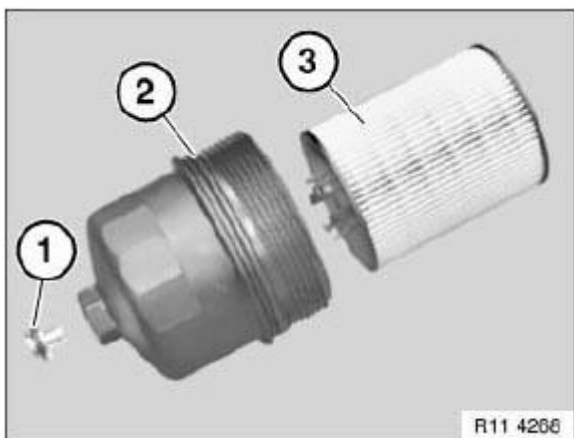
Identifying Oil Filter Element And Sealing Ring
